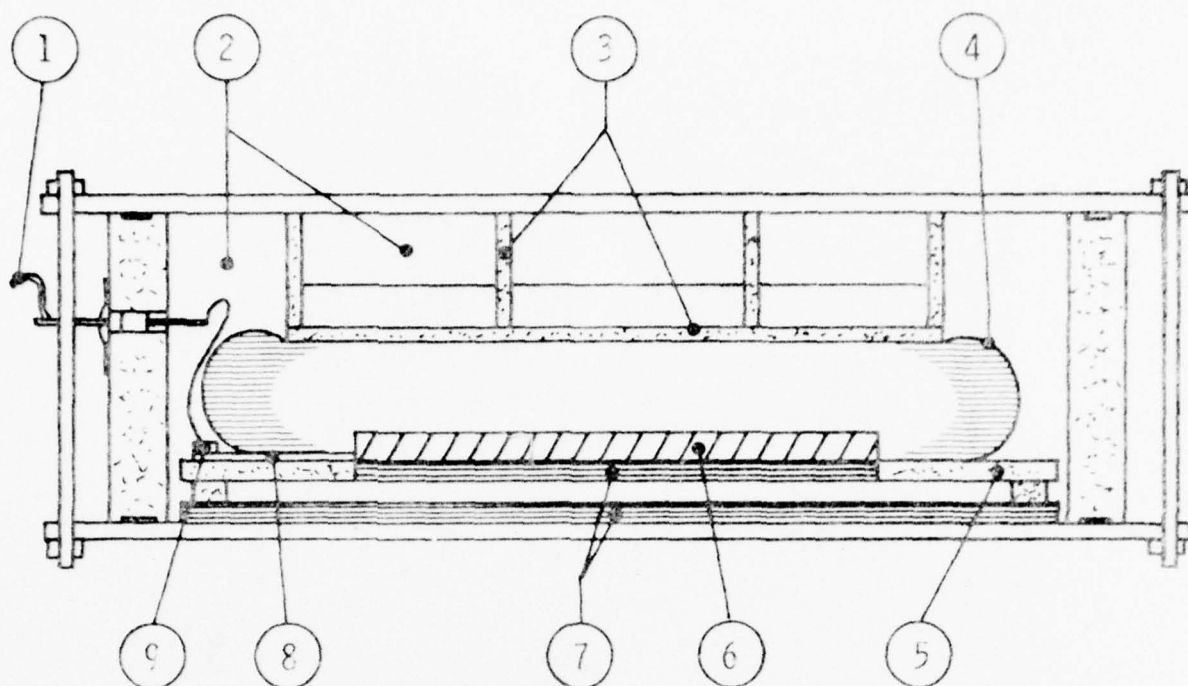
(cont). Arrangement for Vacuum Welding Experiments
